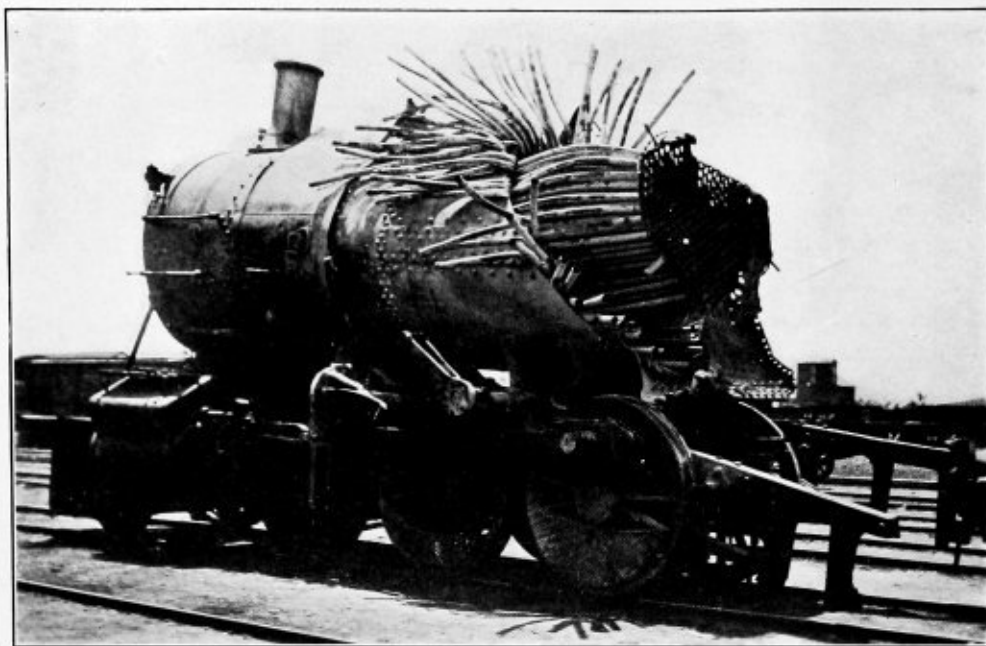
AN EXPLOSION CAUSED BY A FAULTY GAGE
